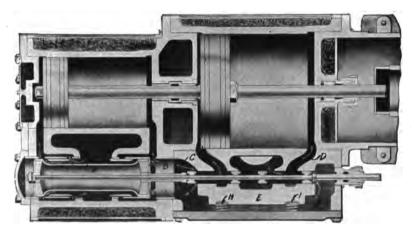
Obtaining Perfect Balance by Use of Double-Ported Piston Valve and Double-Ported Slide Valve in Compound Engine
